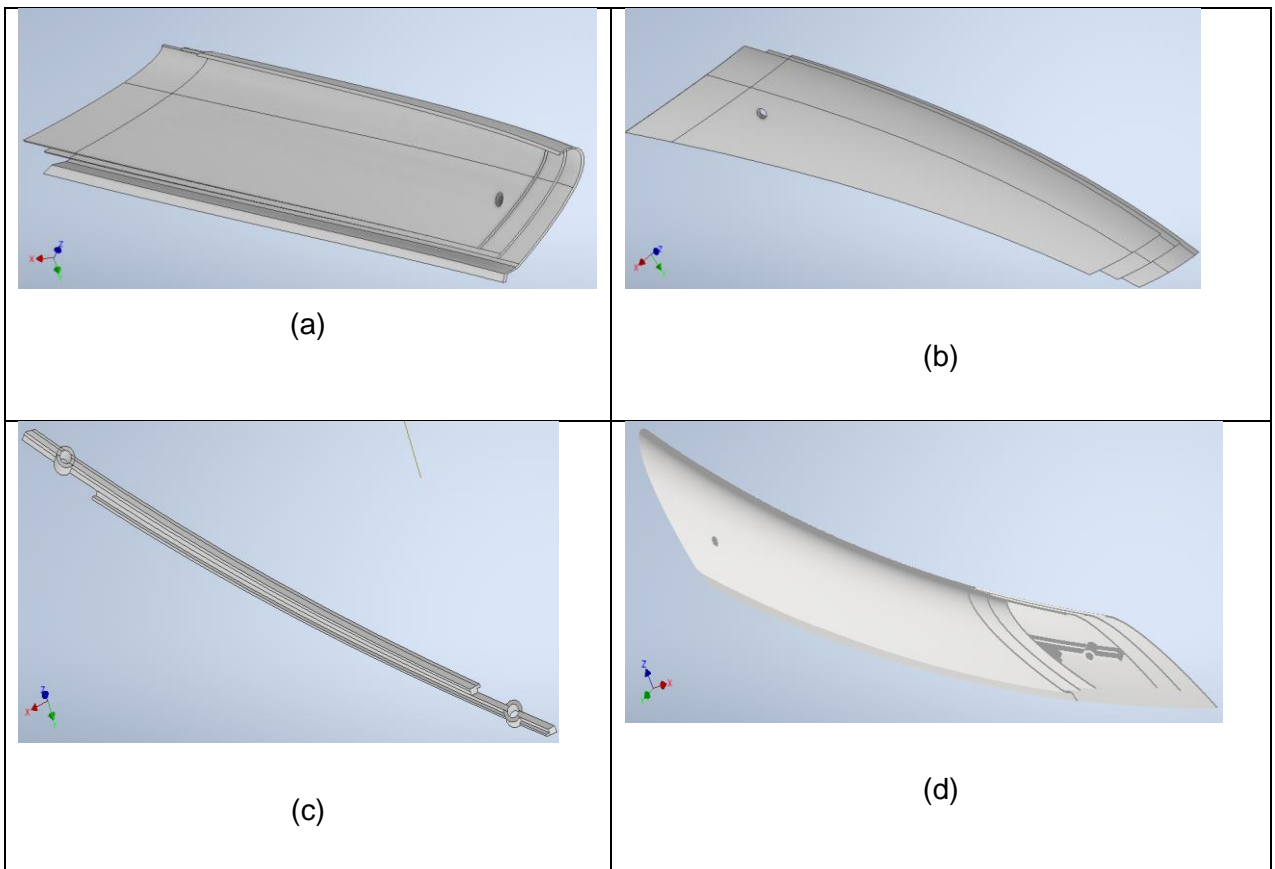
(a) Bottom Part of Blade; (b)Top Part of Blade; (c) Z- section as spar for Blade; (d) Full assembly of part to form single blade section.
